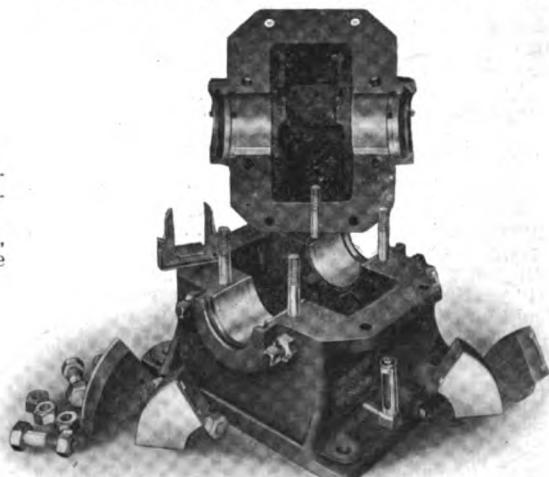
Bearing with two shoes diametrically opposite mounted on adjusting screws
